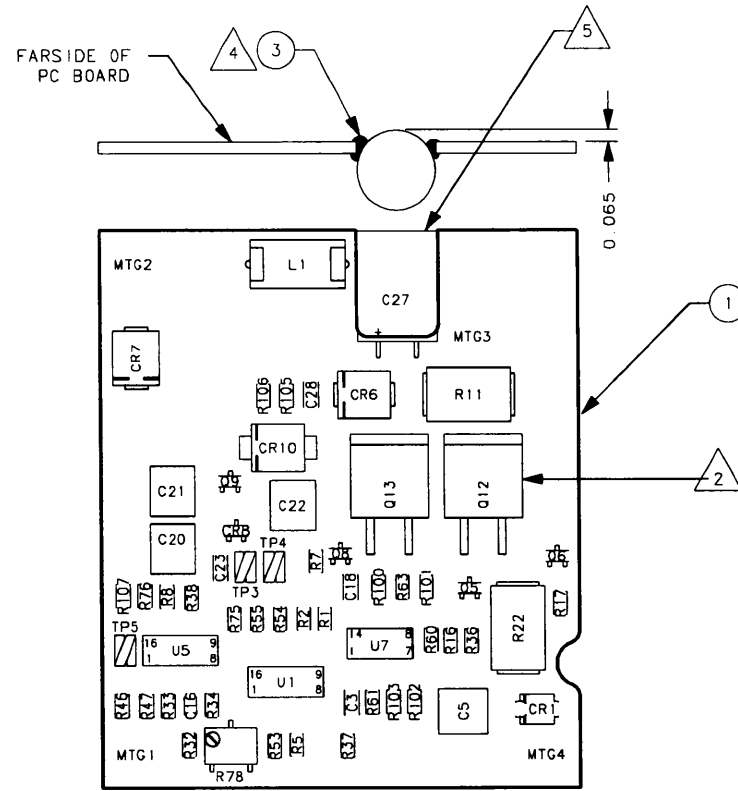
SERVO BOARD ASSEMBLY DWG 300-09656-02
